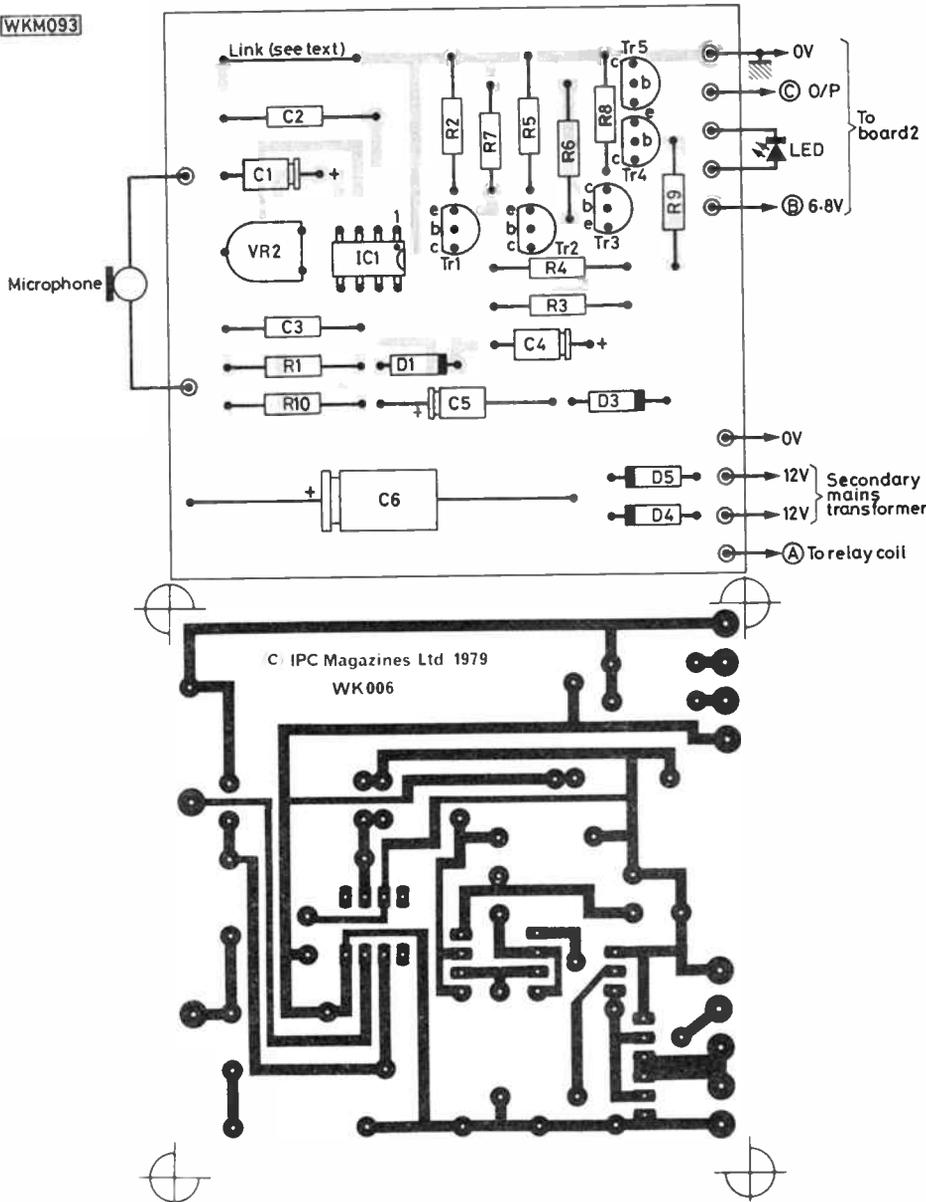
The copper track pattern and component placement drawing for Board 1 shown full size
